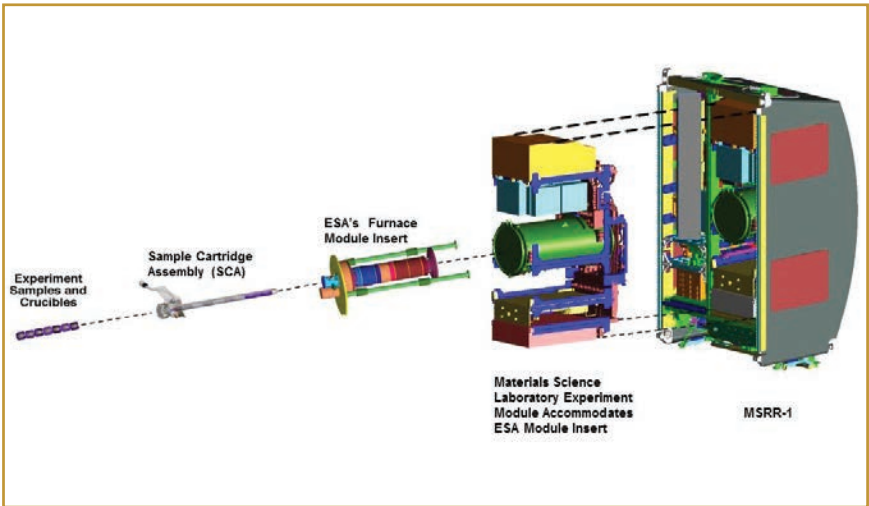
Exploded view of the nested Sample, Sample Cartridge Assembly, Furnace Insert, and Materials Science Laboratory integration into the Materials Science Research Rack.
